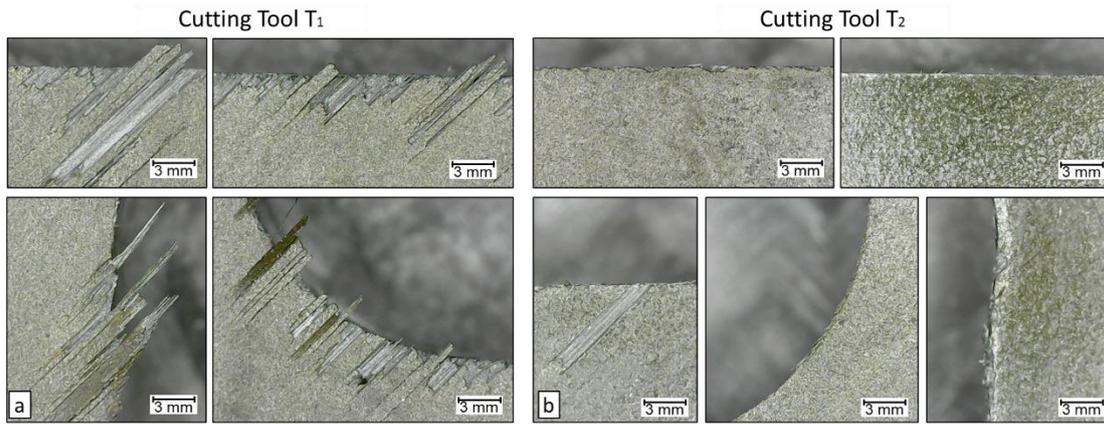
Machined part resultant from the third experiment: a) parts machined with cutting tool T1 and b) parts machined with cutting tool T2.
